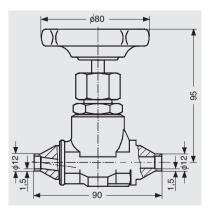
/114 Shut-off valve 7MF9017-1E, dimensions
